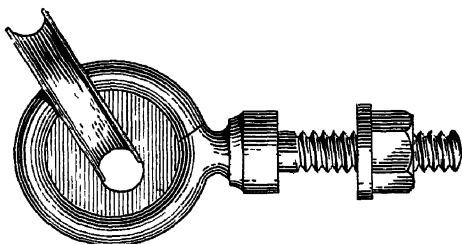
CORD PULLEYS FOR INDICATOR DRIVES
